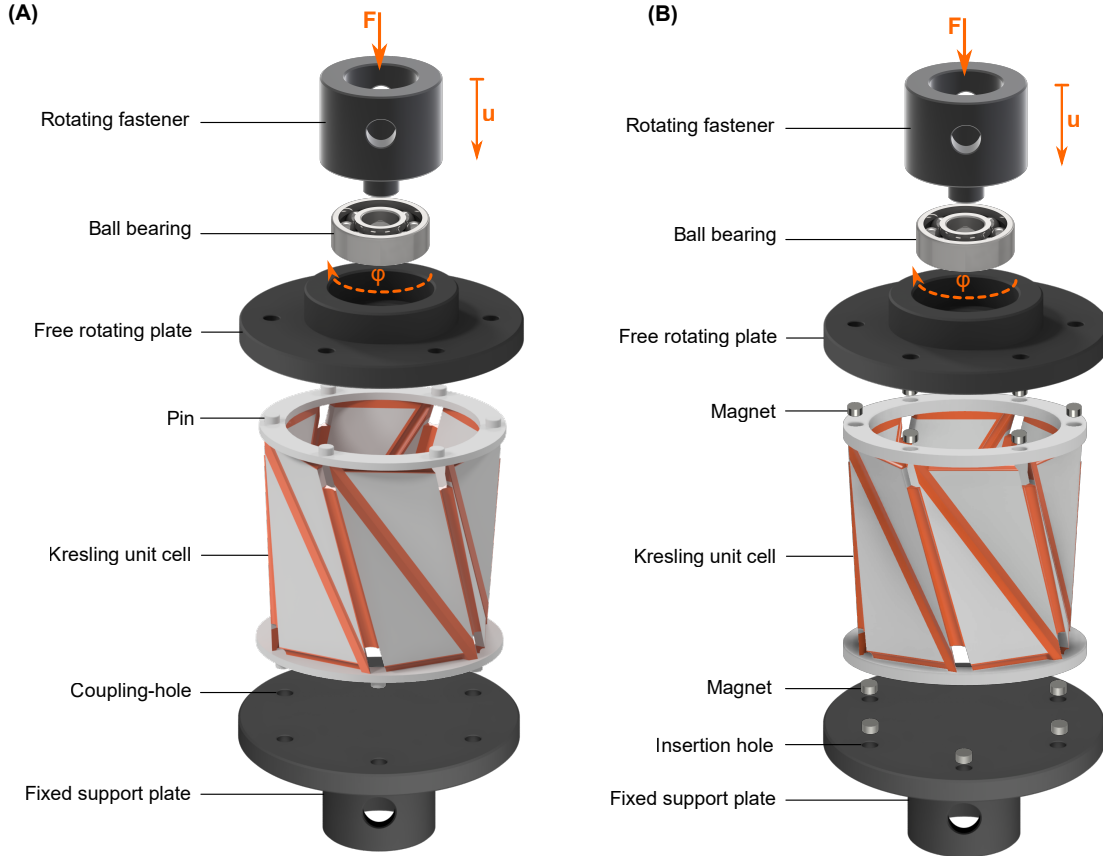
Experimental setup for compression test with an applied Load F and displacement u . Exploded schemes of the experimental setups with a fixture at the top, enabling a free rotation ϕ , and a fixed support fixture at the bottom with the following connection systems: (A) Pins and (B) Magnets.
